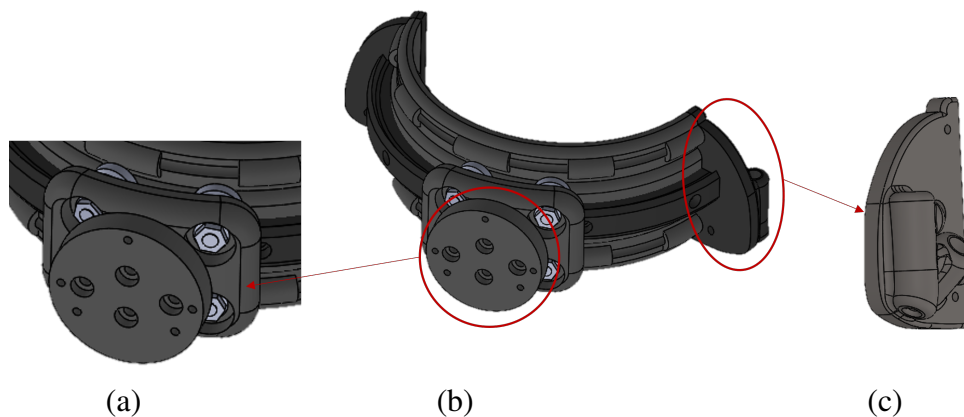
Shoulder bracelet CAD components: Shoulder slider guide circumferential rail (b), shoulder anchor point mounted on slider carriage (a), connector for elbow cable routing guidance (c).
